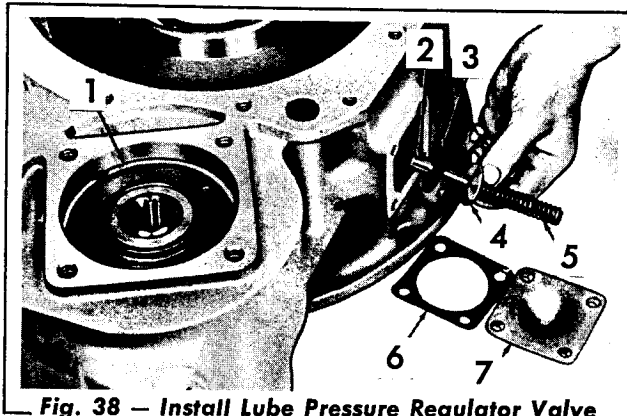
Install Lube Pressure Regulator Valve and Implement Pump Gear Snap Ring
